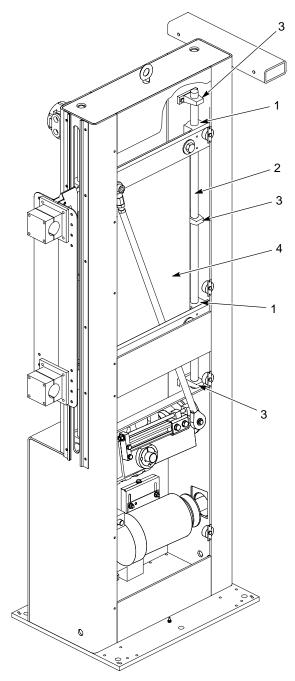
Gun Carriage Linear Bearing and Guide Rod Replacement
